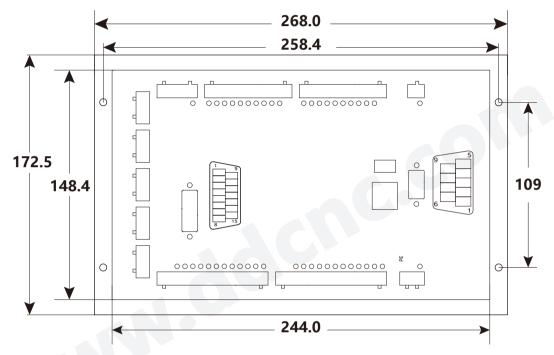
DDCS-Expert(DDCSE) Back view and dimensions
